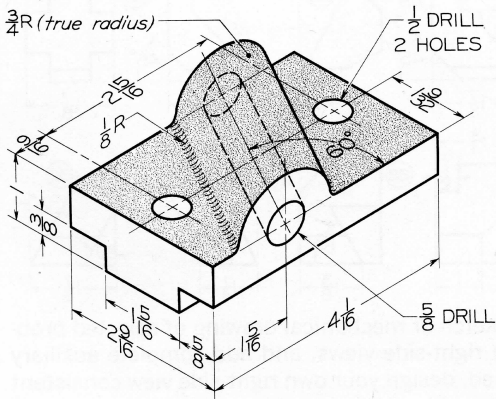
Angle Bearing. Draw necessary views, including a complete auxiliary view (Layout A-3).
